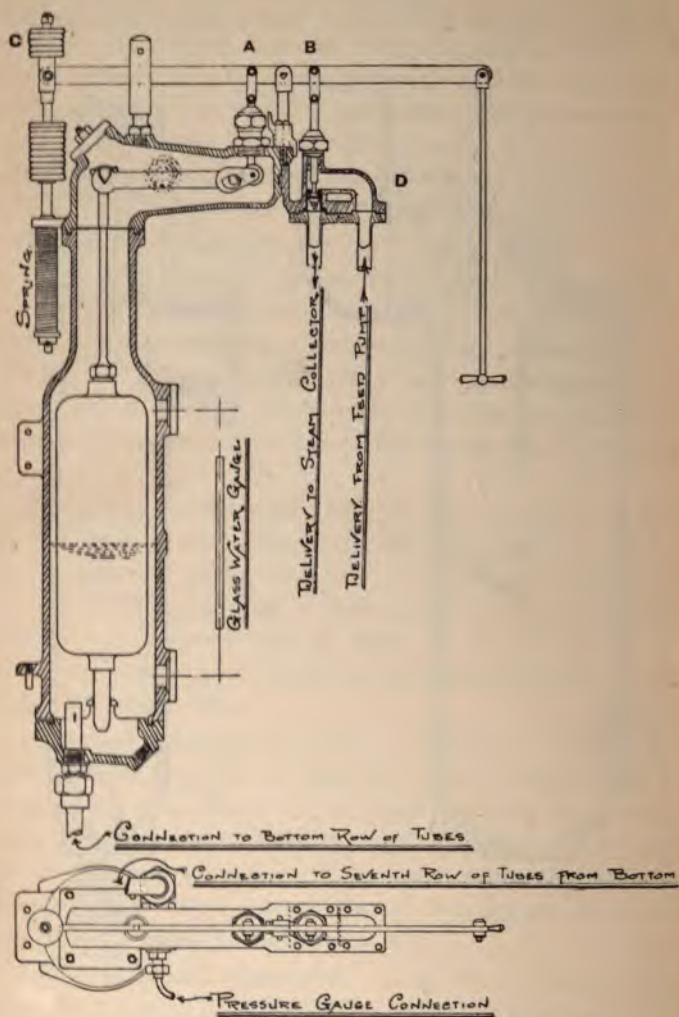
BELLEVILLE BOILER AUTOMATIC FEED.
